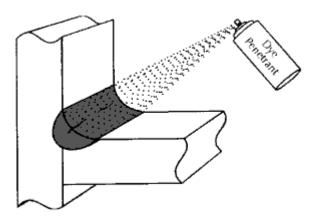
Liquid penetrant inspection method [8]
